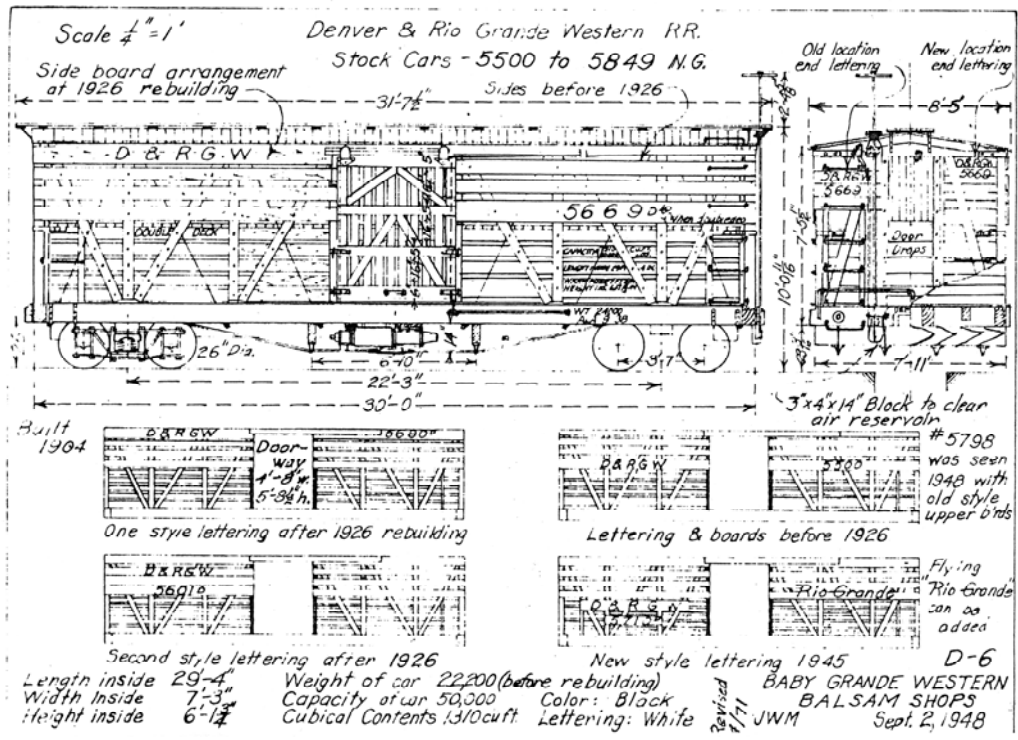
Drawing of Box Car Series 5500-5849, Back door to the Black Canon Appendix
